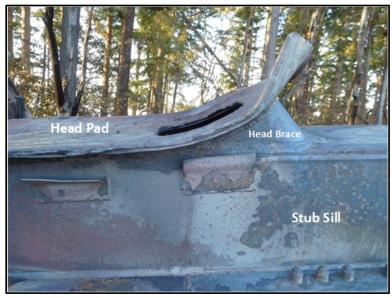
A-end head pad separation from tank, fractured fillet weld, January 5, 2021, courtesy Washington UTC.
